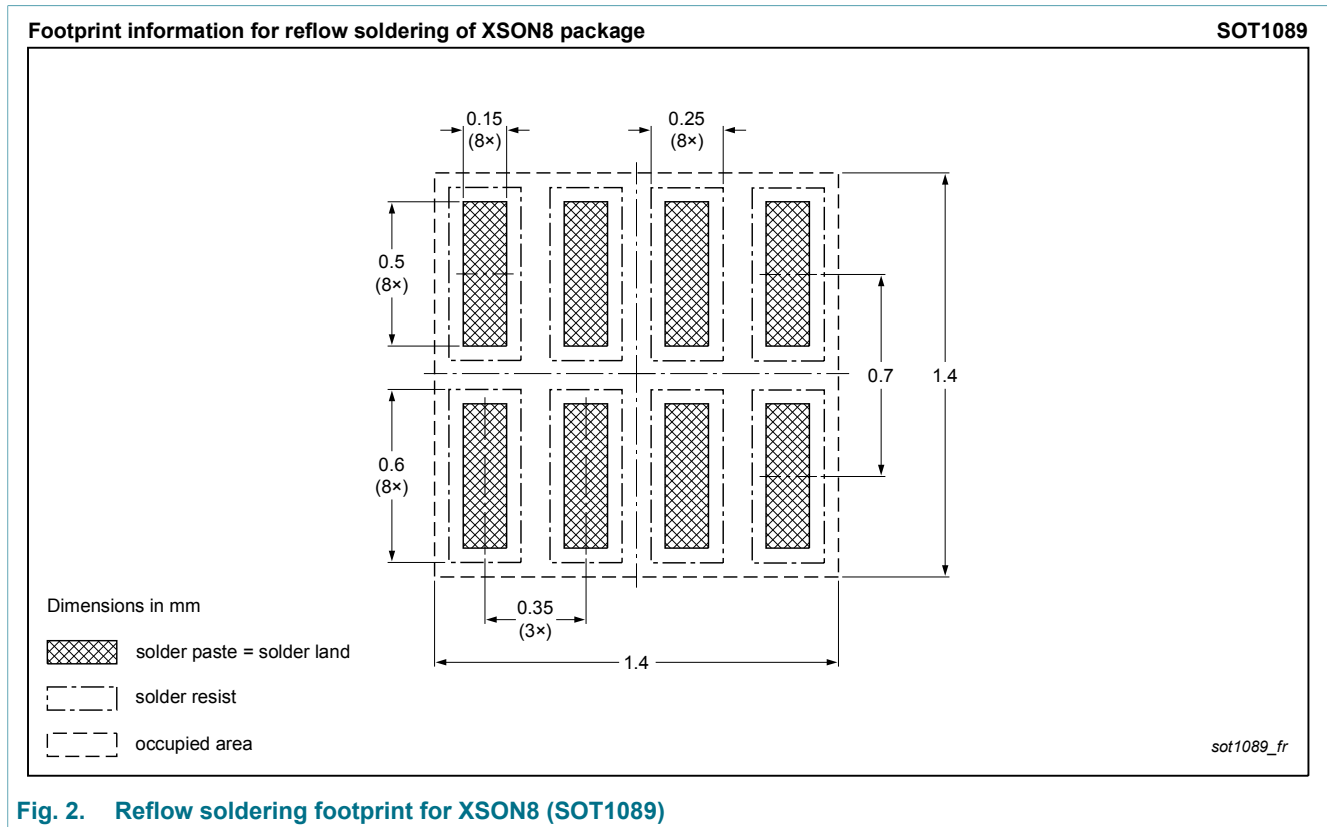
Reflow soldering footprint for XSON8 (SOT1089)
